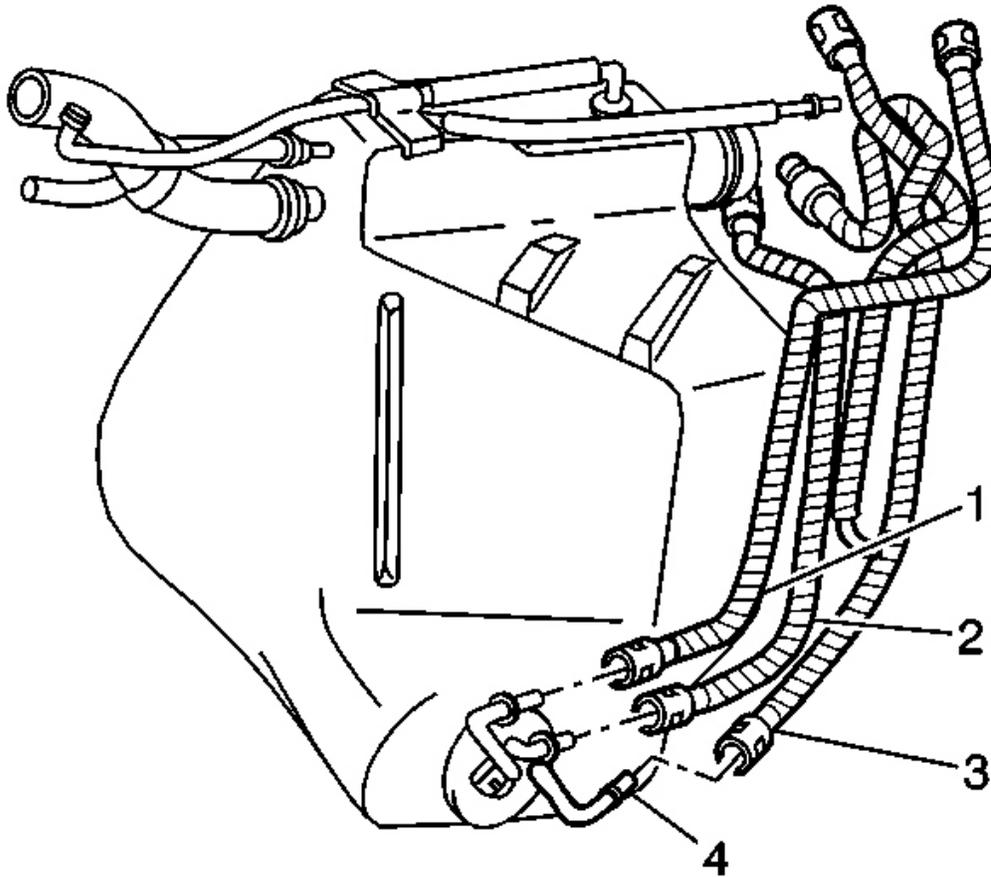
Fuel Return Pipe & Fuel Feed Pipe (Left Tank)
